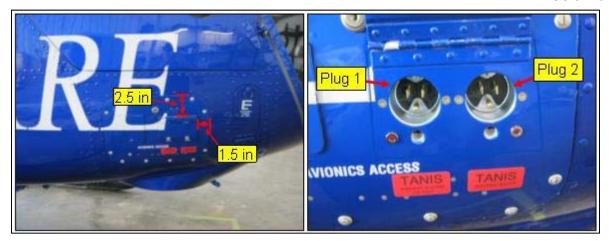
Example of plug door and plugs. Locate in avionics panel (900F2307022-101) below forward right crew door. Plug-1 primary preheat system, placard TU02615-. Plug-2 cabin heater and optional VAC outlet, placard TU03119-01. Door doubler is positioned approximately 2.5 inches down form top edge and 1.5 inches from right edge of panel.
